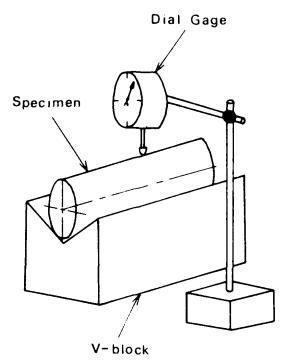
Assembly for Determining the Straightness of the Cylindrical Surface
